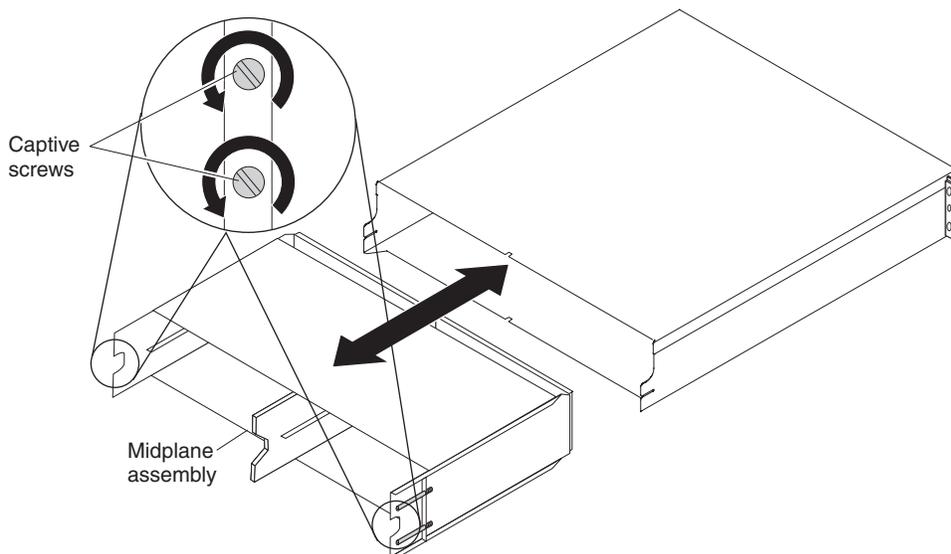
Replacing the midplane assembly in a DS3512 or EXP3512
